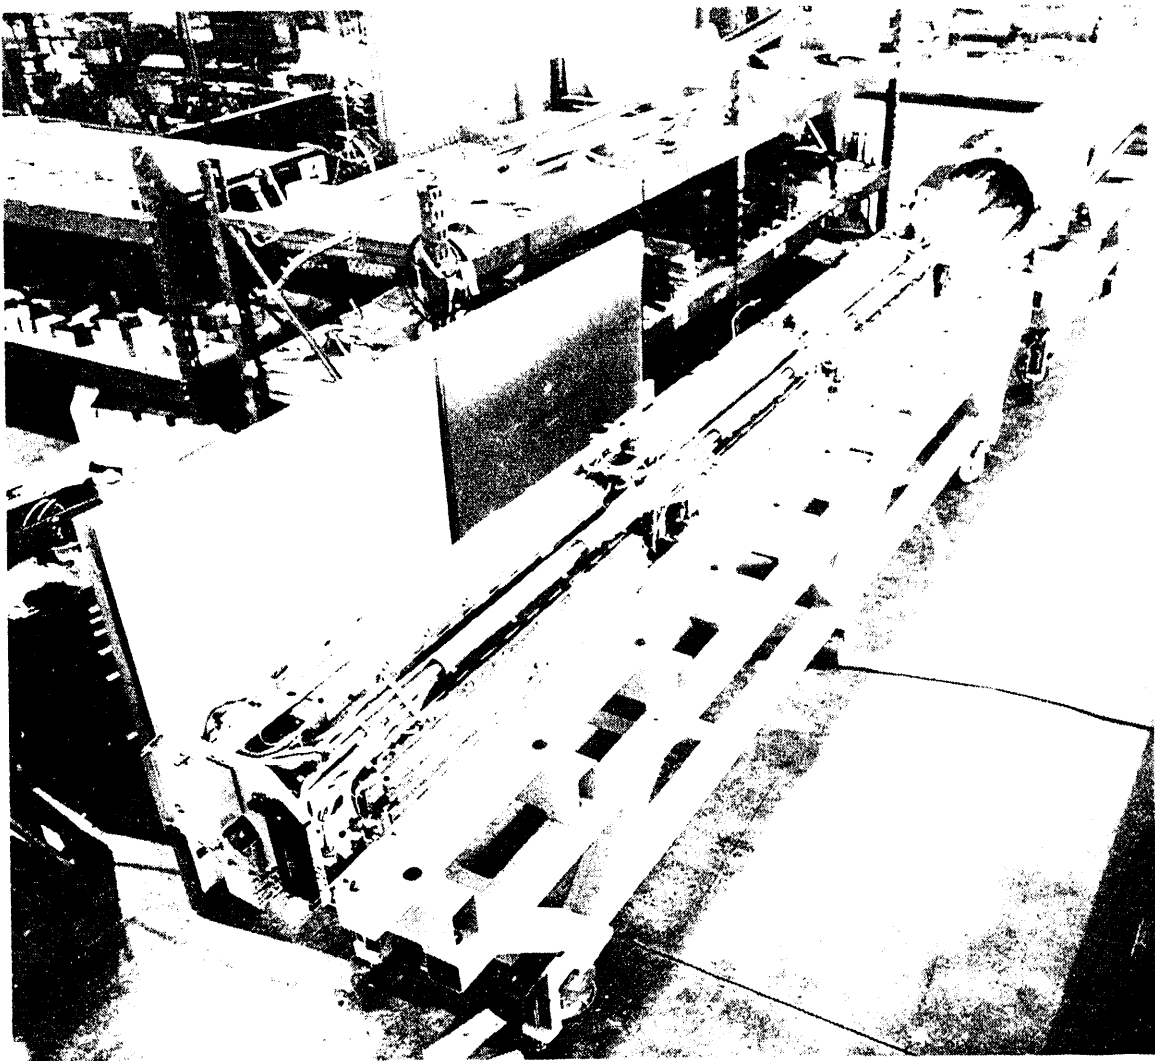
Illustration showing the assembly technique for the SLC final focus triplet barrel.
